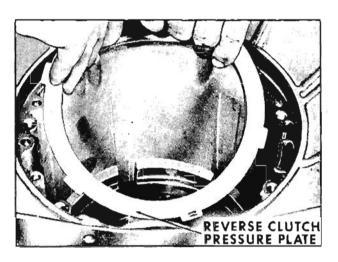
Removing Reverse Clutch Pressure Plate
